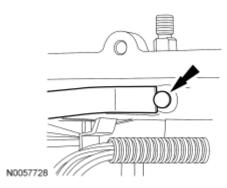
Locating TR Sensor Locking Pin Courtesy of FORD MOTOR CO.
